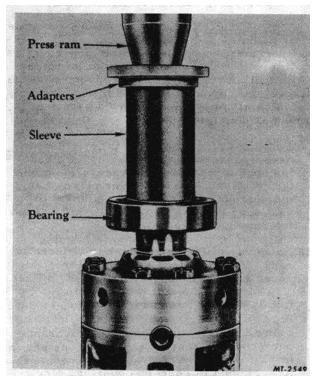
Pressing Front Bearing on Inter-Axle Differential Case.
